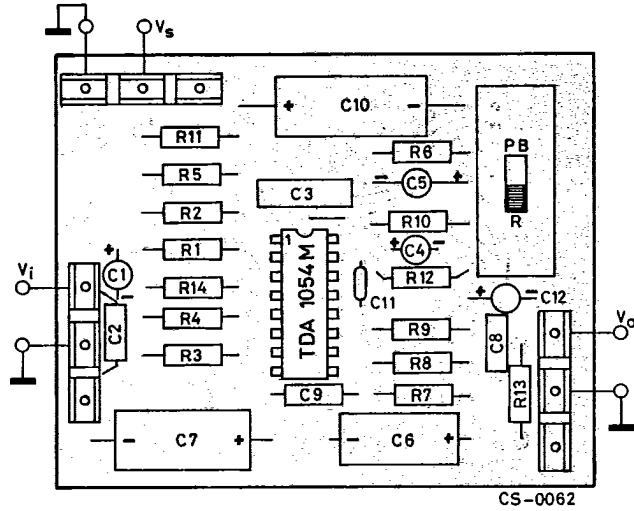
P.C. board and component layout for the circuit in fig. 18 (1:1 scale)
